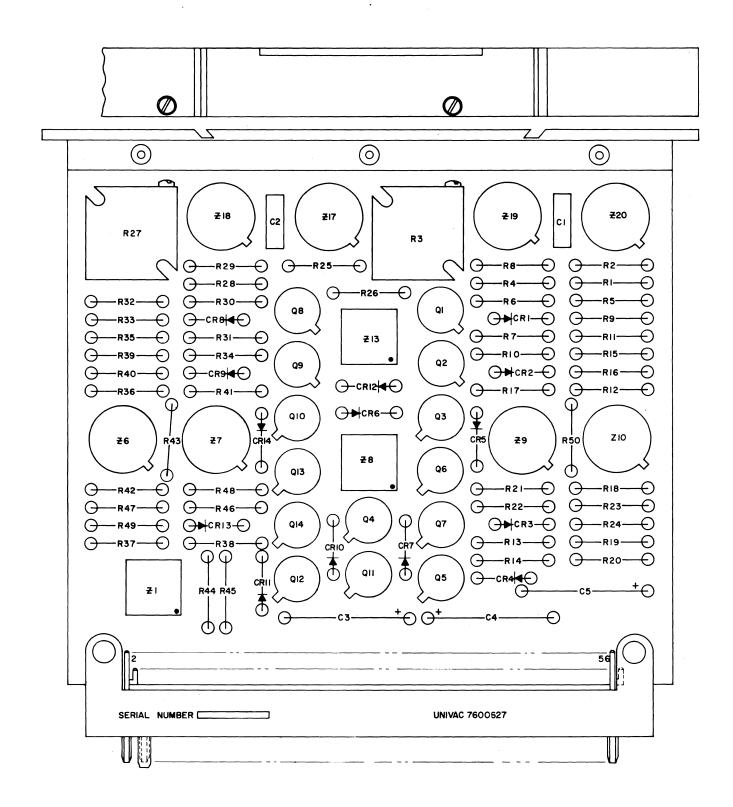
Reel Servo Input Circuit Card Assembly (7600627)
